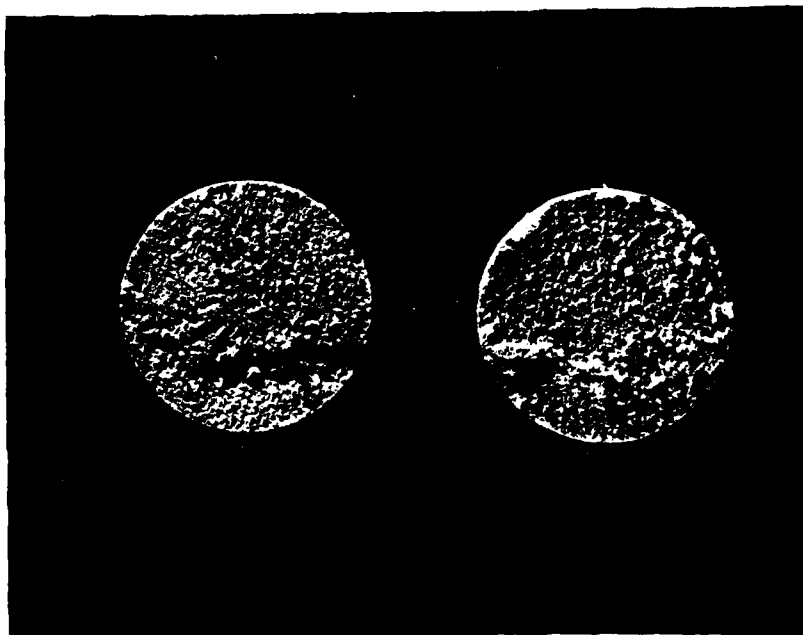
Typical stress rupture fracture surfaces from a René 80/D 15 15-mil joint. Conditions: 1700°F - 30,000 psi.
